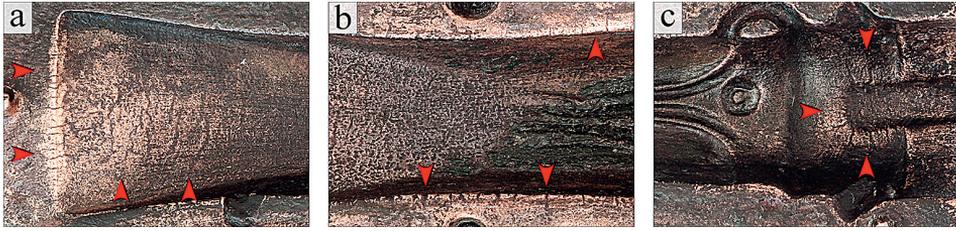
Thermal fatigue cracks left on the inner side of the casting mould from Elgiszewo: a – blade part; b – socket part; c – neck part.
